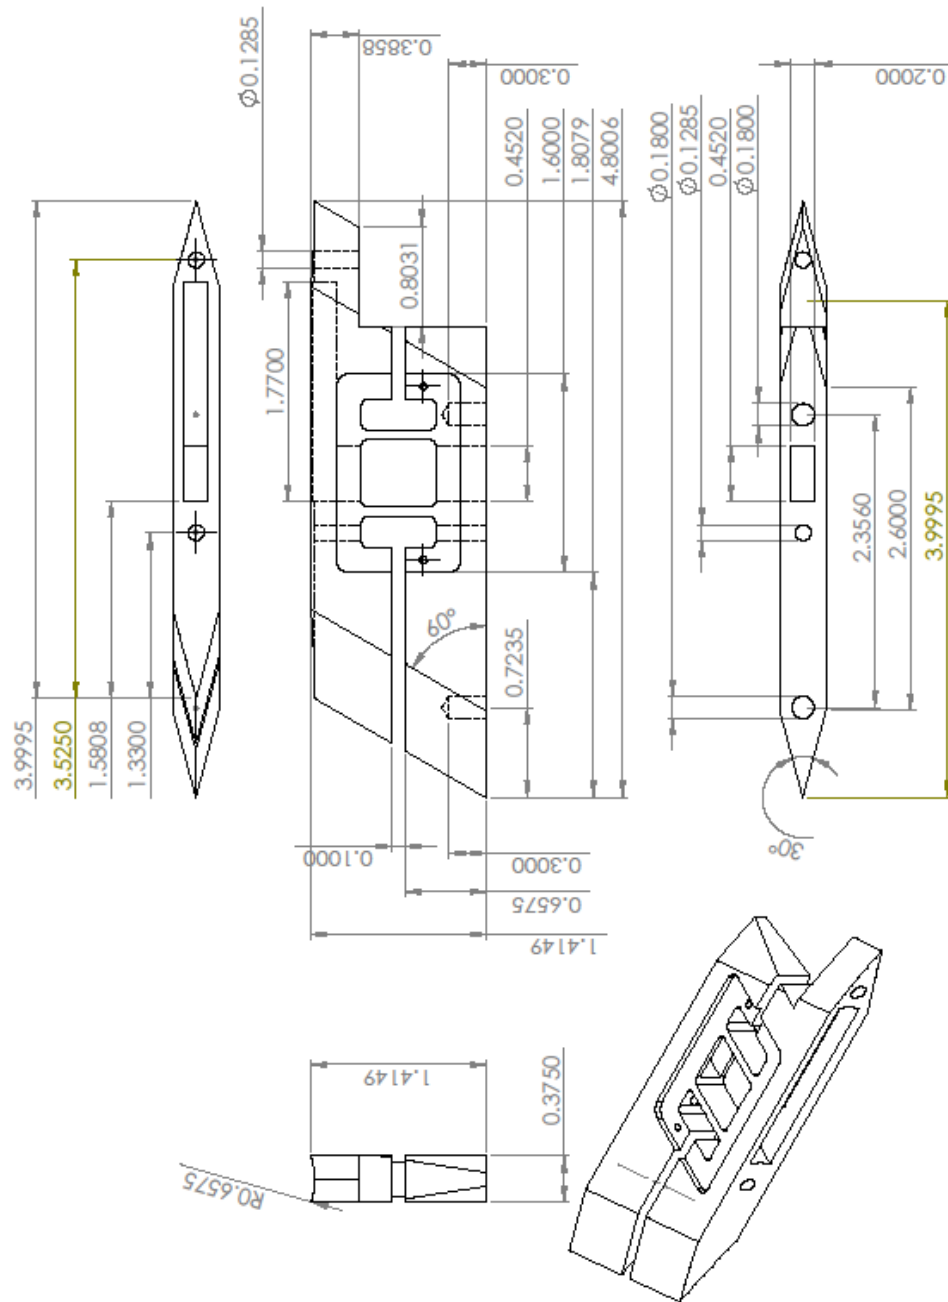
Modified Flexure showing dimensions of the cut made (RJ - 8 - 3). After [3].
